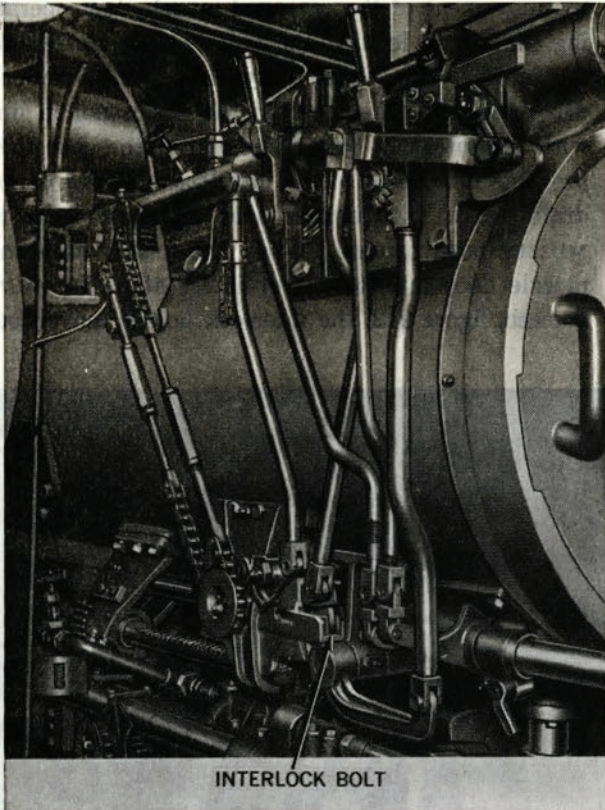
Drain Valve and Muzzle Door Interlock at DRAIN VALVE LOCKED—Firing Interlock at TUBE READY TO FIRE.
